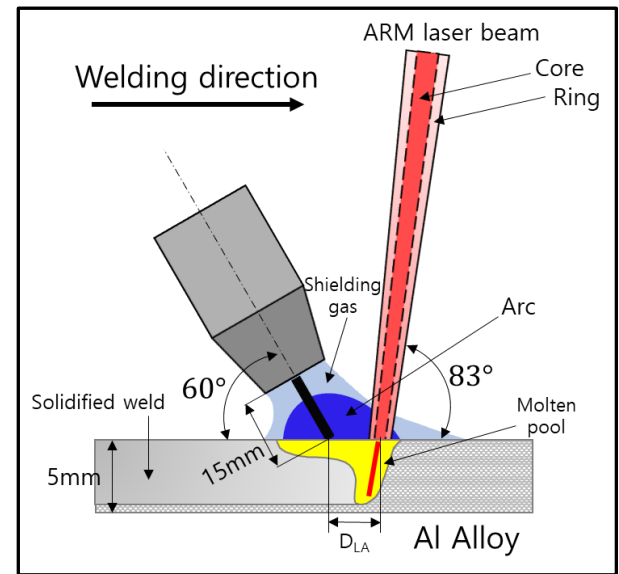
Schematic diagram of ARM laser-arc hybrid welding.
